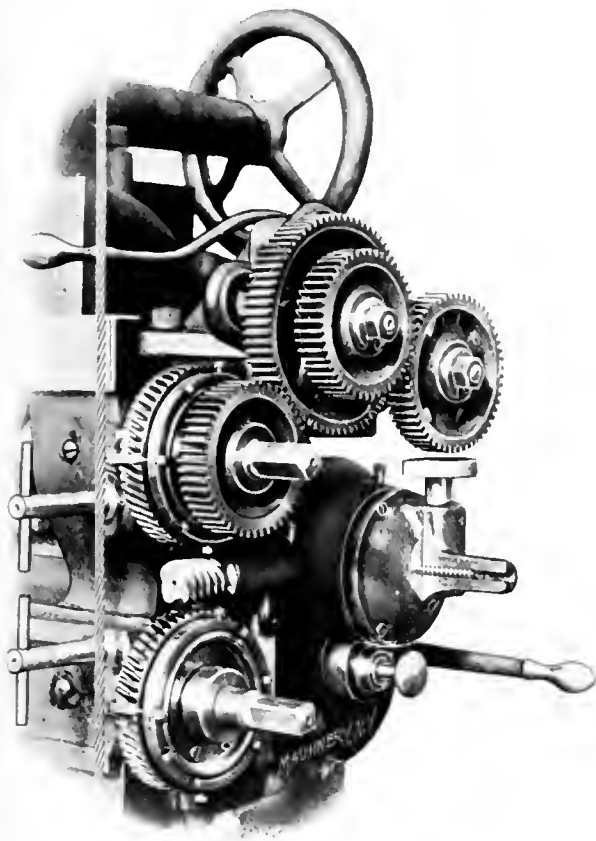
View of Feed Gearing Set up for Thread Cutting; Indicator Clips for Setting Tools and Stopping Cuts are also shown.
